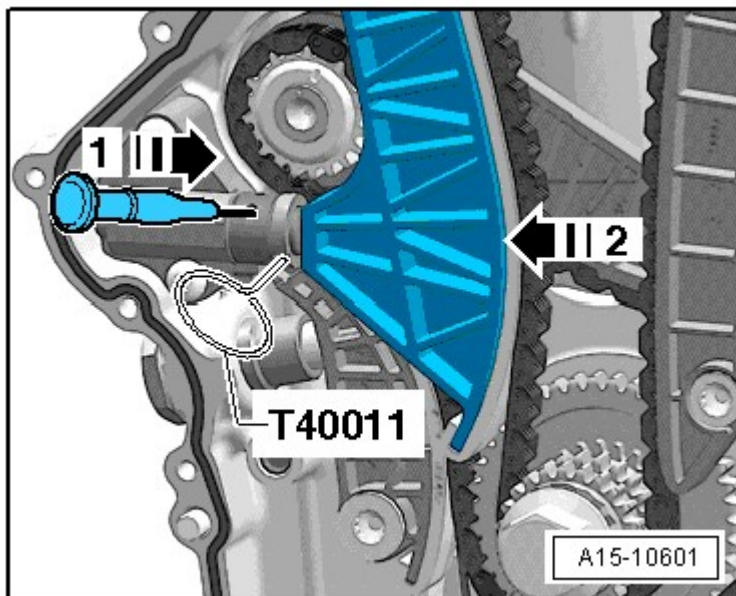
Inserting Screwdriver Into Chain Tensioner Hole And Pressing Timing Chain Tensioning Rail
